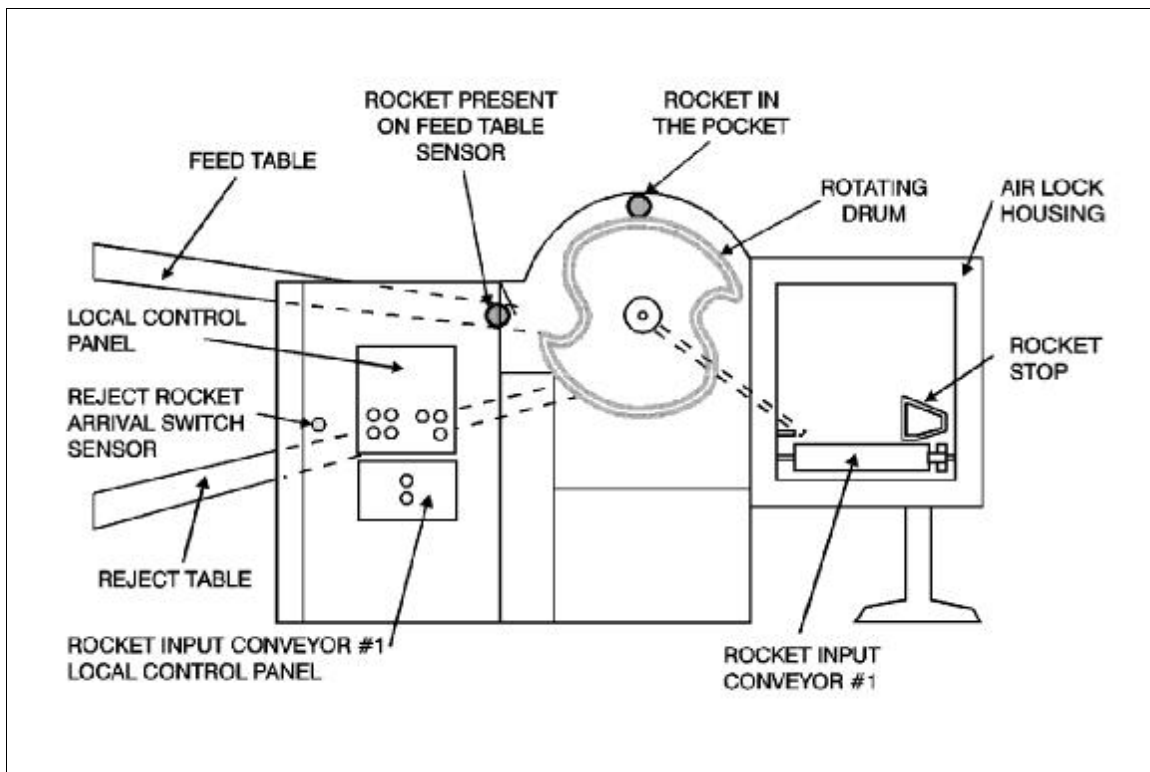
Rocket Metering Input Assembly (Rear View)
